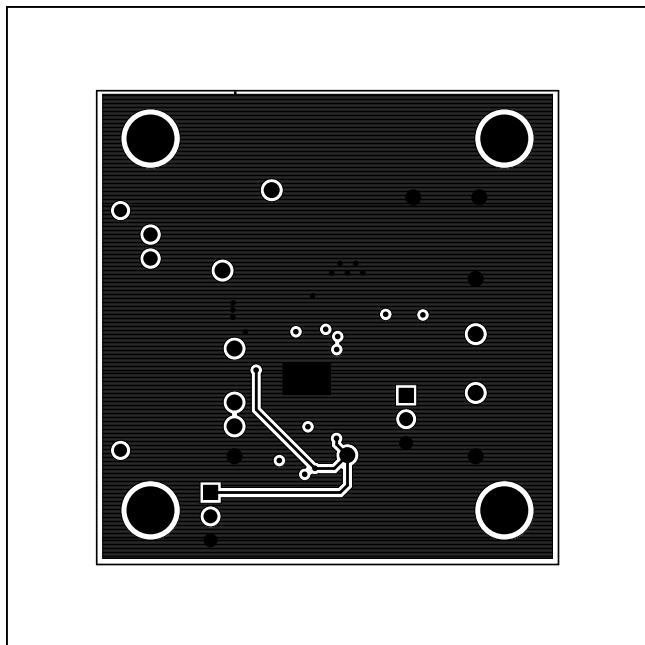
MAX16936 EV Kit PCB Layout—Layer 3
